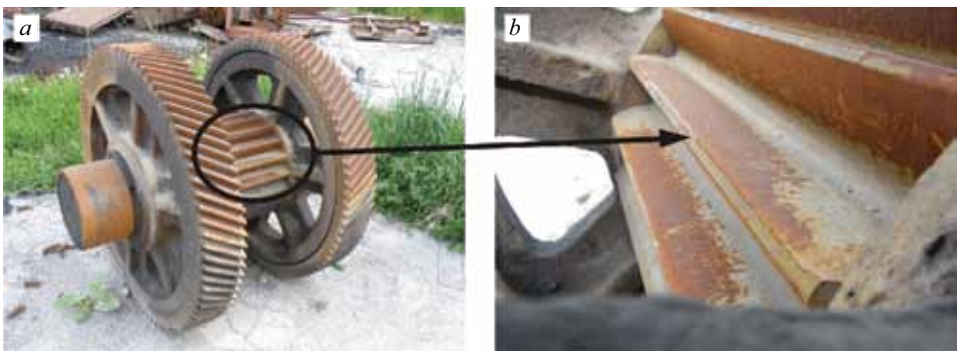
Photographs of the shaft S_2 an overall view (a) and a pinion detail, surfaces where plastic flow occurs (b)
